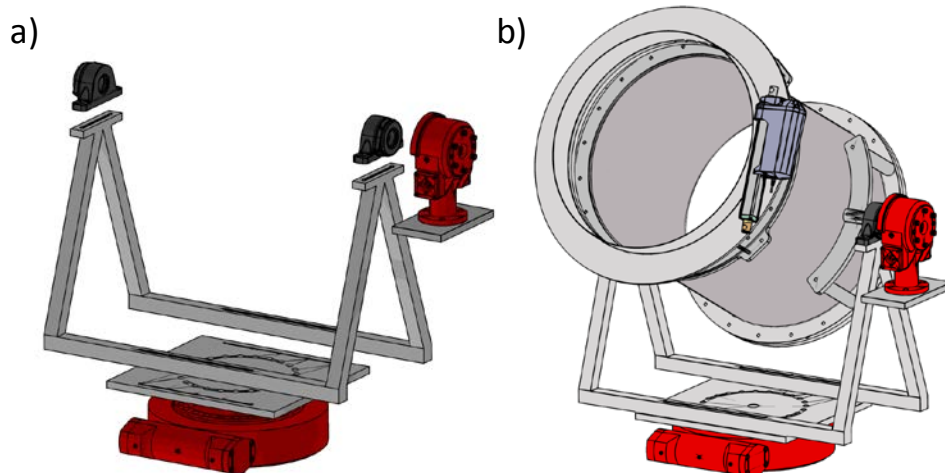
a) Explosion plot of the tracker constructed for the solar concentrator. b) CAD assembly of the final concentrator
